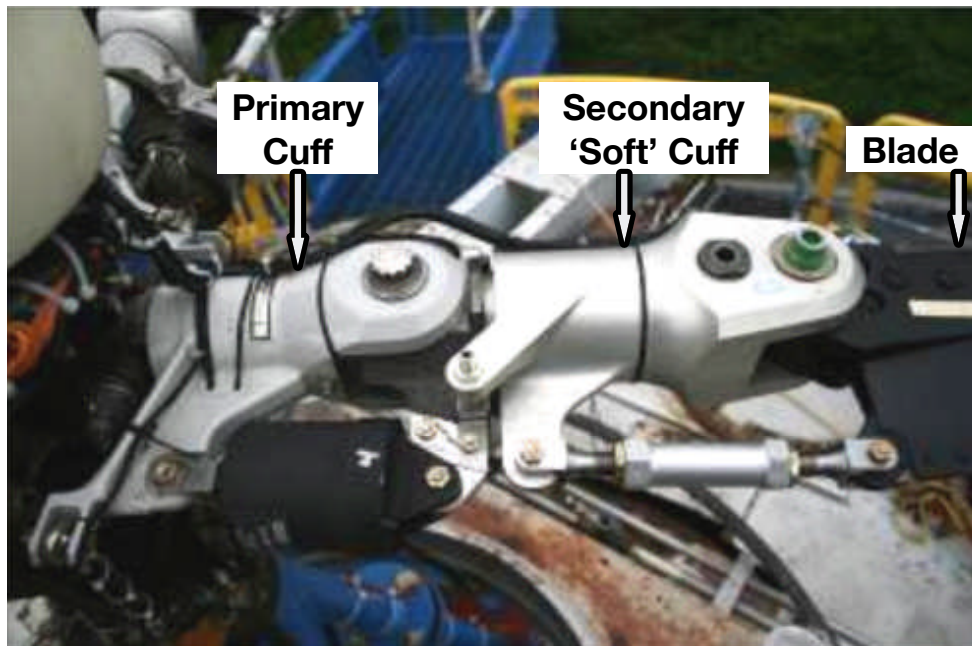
Secondary cuff mounted between primary cuff and blade root [176].
